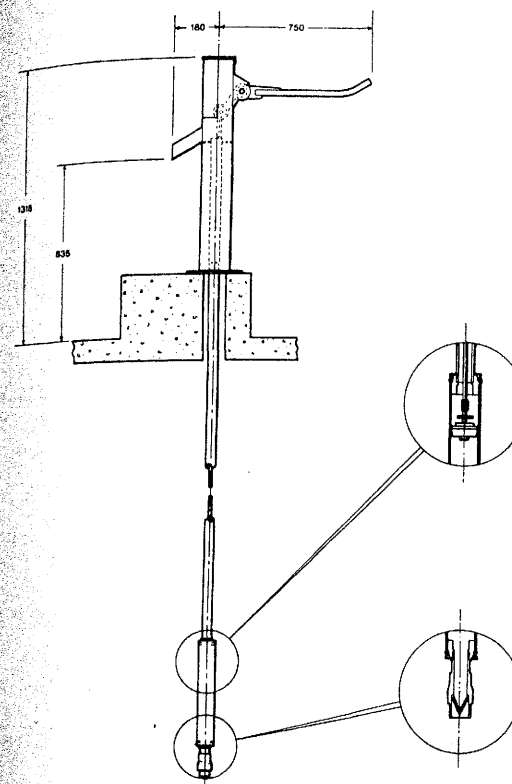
The India Mark II pump: a hand-operated deep-well lift pump. It is manufactured in several developing countries (dimensions are in millimetres)
